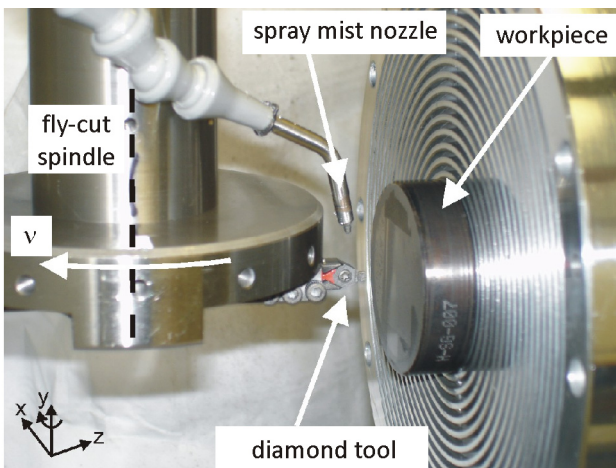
Fly-cutting of an electroless nickel plated mold on a Precitech Freeform 3000 ultra-precision machine
